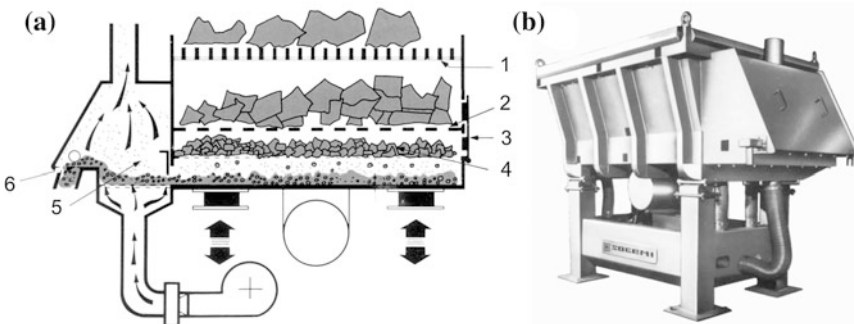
Schematic Gamma-Mill type reclaimer and—the device: a 1 grate for shaking out and preliminary crushing of used molding sand, 2 intermediate grate for grinding molding sand, 3 a window to remove metal contaminants, 4 compartment sieve for final grinding and sieving, 5 classificatory pneumatic fluid bed, 6 sieve chute reclaimer, b view [1]
